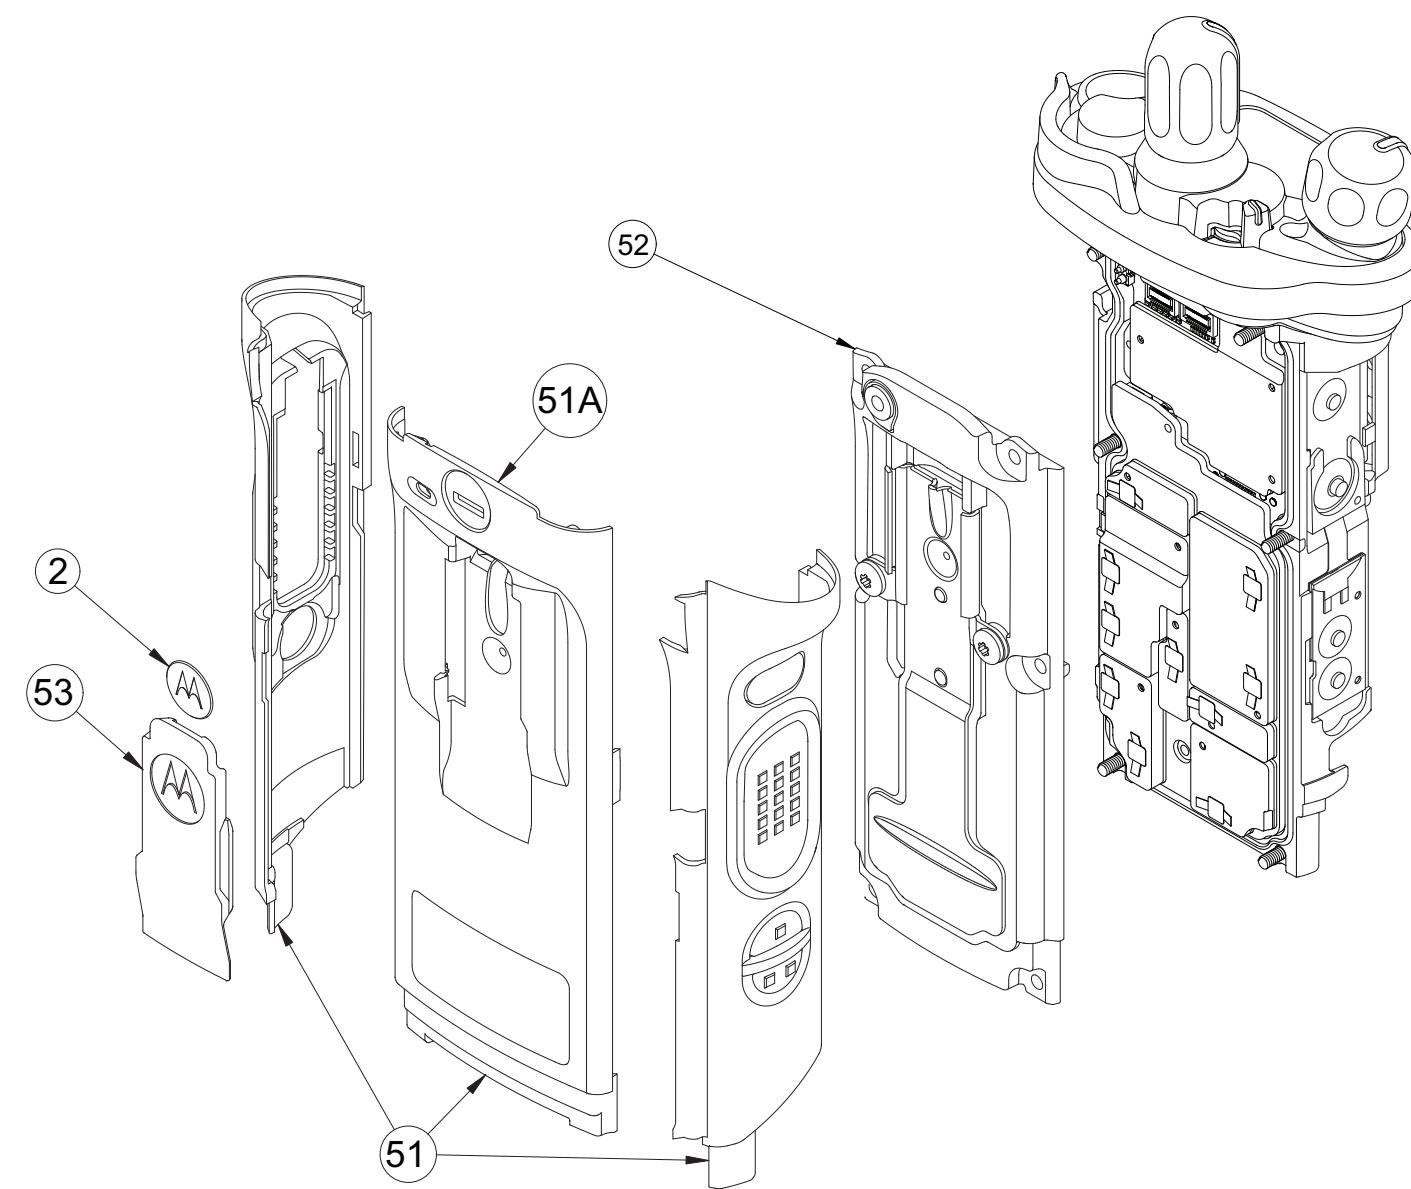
APX 6000XE Dual Display (Front Housing Limited Keypad) Exploded View
